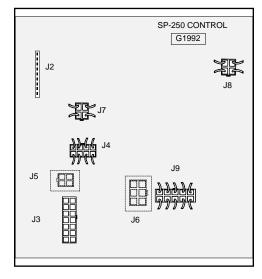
B - Control Board Molex Plug Locations for G1992 PC Control Board (Code 9402 only.)
